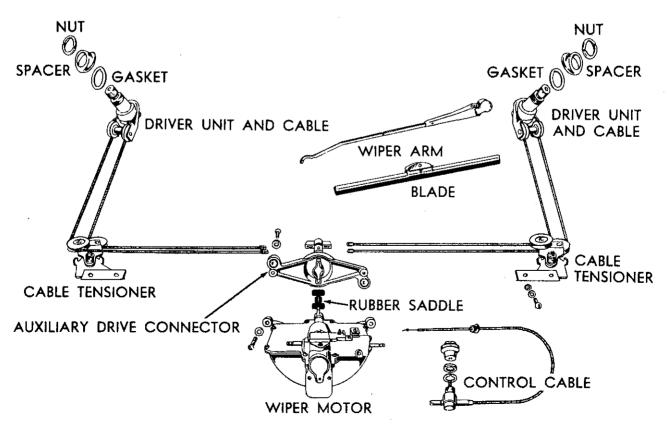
Champion and Commander Windshield Wiper Assembly
